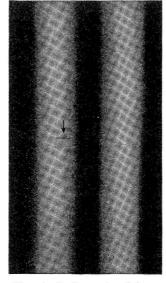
Radiograph of butt welds. Left—Example of a bad weld. Right—Example of a perfect weld.
